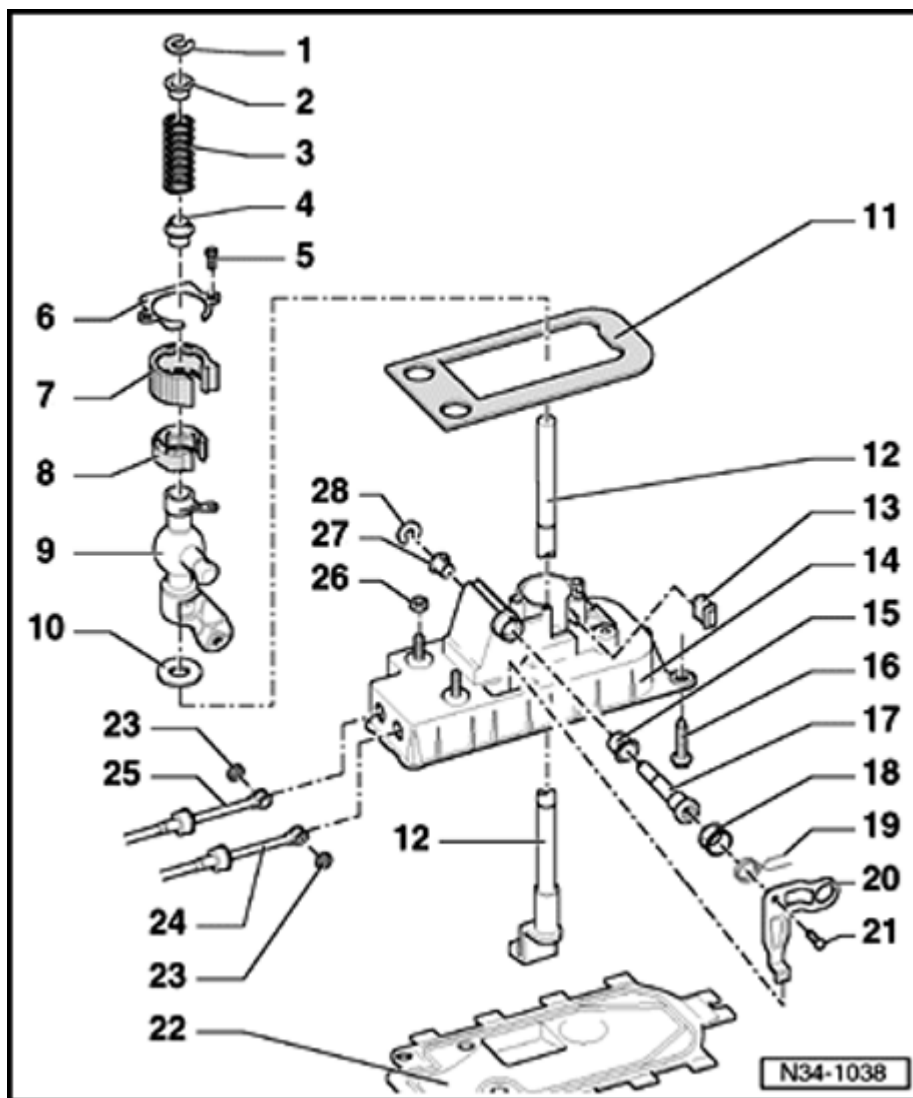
Shift lever cover, separating and assembling to shift lever knob
